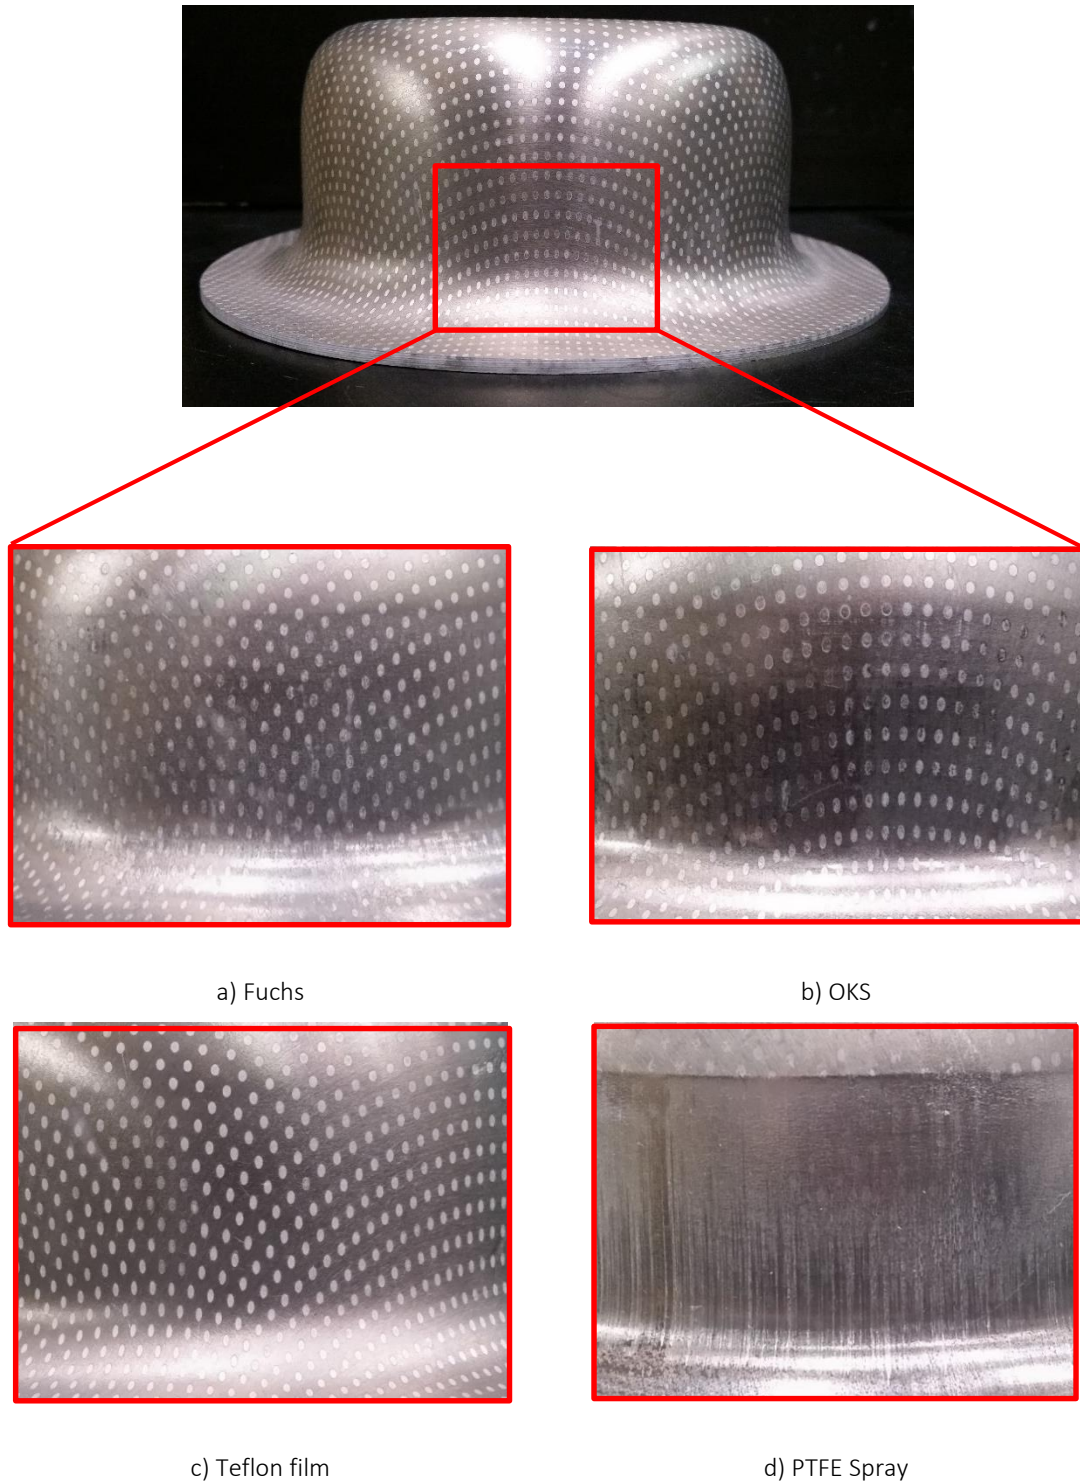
Visual inspection of circular cup sidewall (after cleaning) for AA70XX T76. Cups were drawn under isothermal conditions at 170°C to a target depth of 55 mm. The initial blank diameter corresponded to 203.2 mm, resulting in a drawing ratio of 2.0, the cup target depth was 55 mm.
